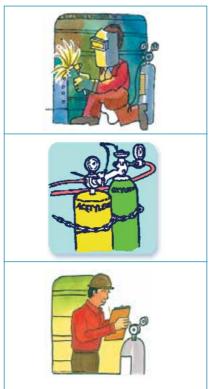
Typical equipment used in ony/acetylene gas welding and similar processes
